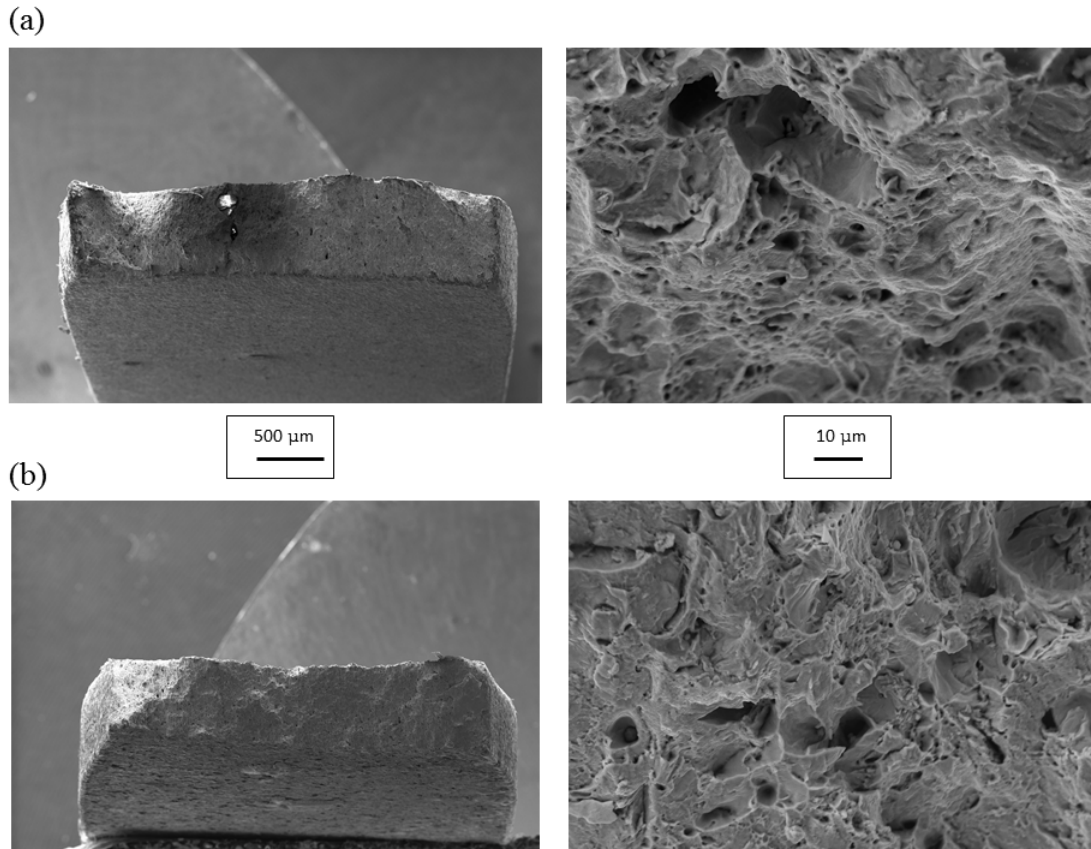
Fractography of 1018 steel fractured in (a) air at 328°C and (b) molten lead at 328°C showing similar failure.
